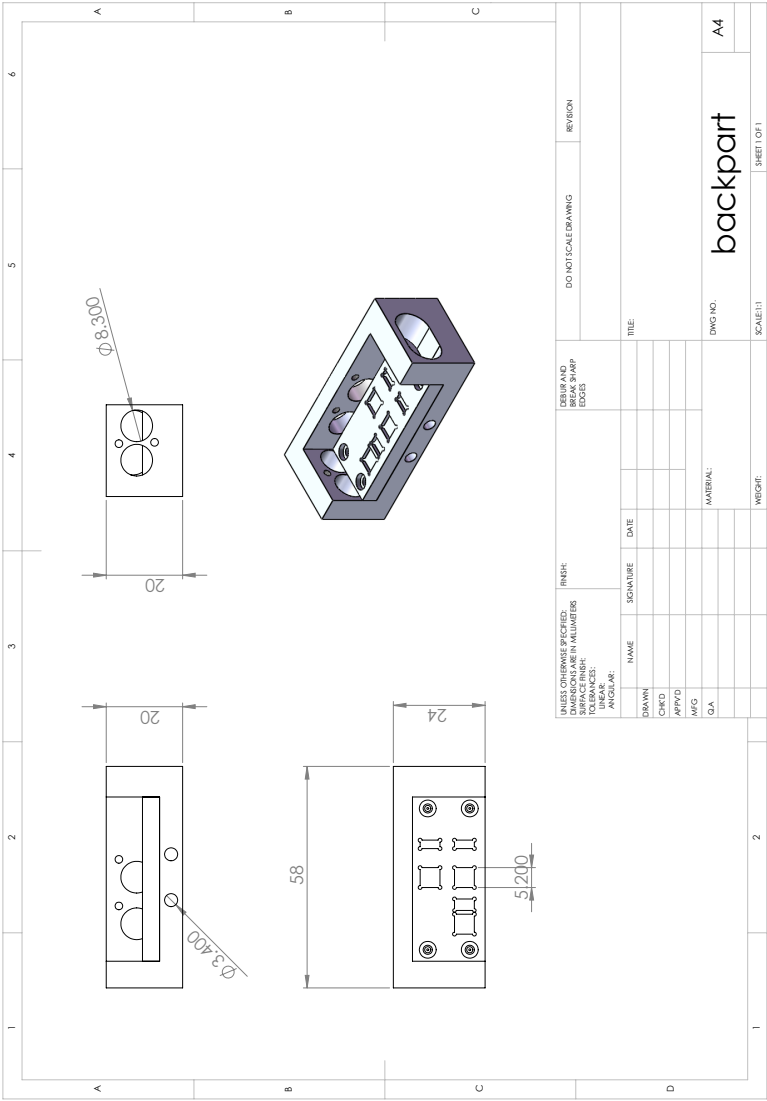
CAD drawing of back piece housing the interfering optics and the photodiodes. The template with grooves to position optics is a separate piece fixed onto the back part.
